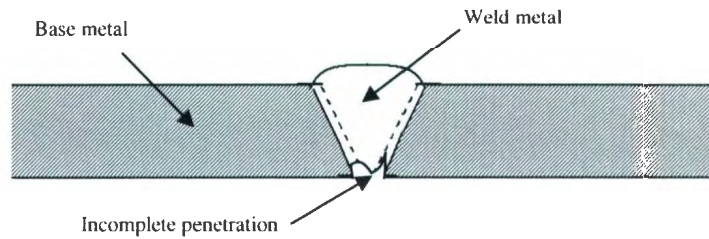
Incomplete penetration in a welding joint
